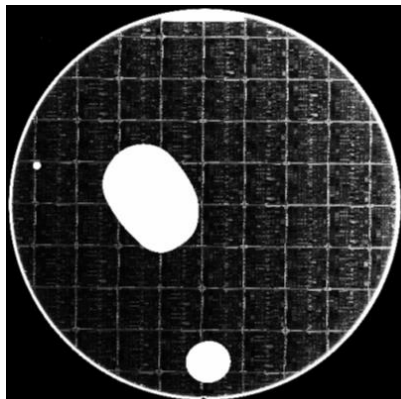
CMOS-SOI wafers showing bonding defects: large unbonded surfaces are clearly visible through the SAM.
